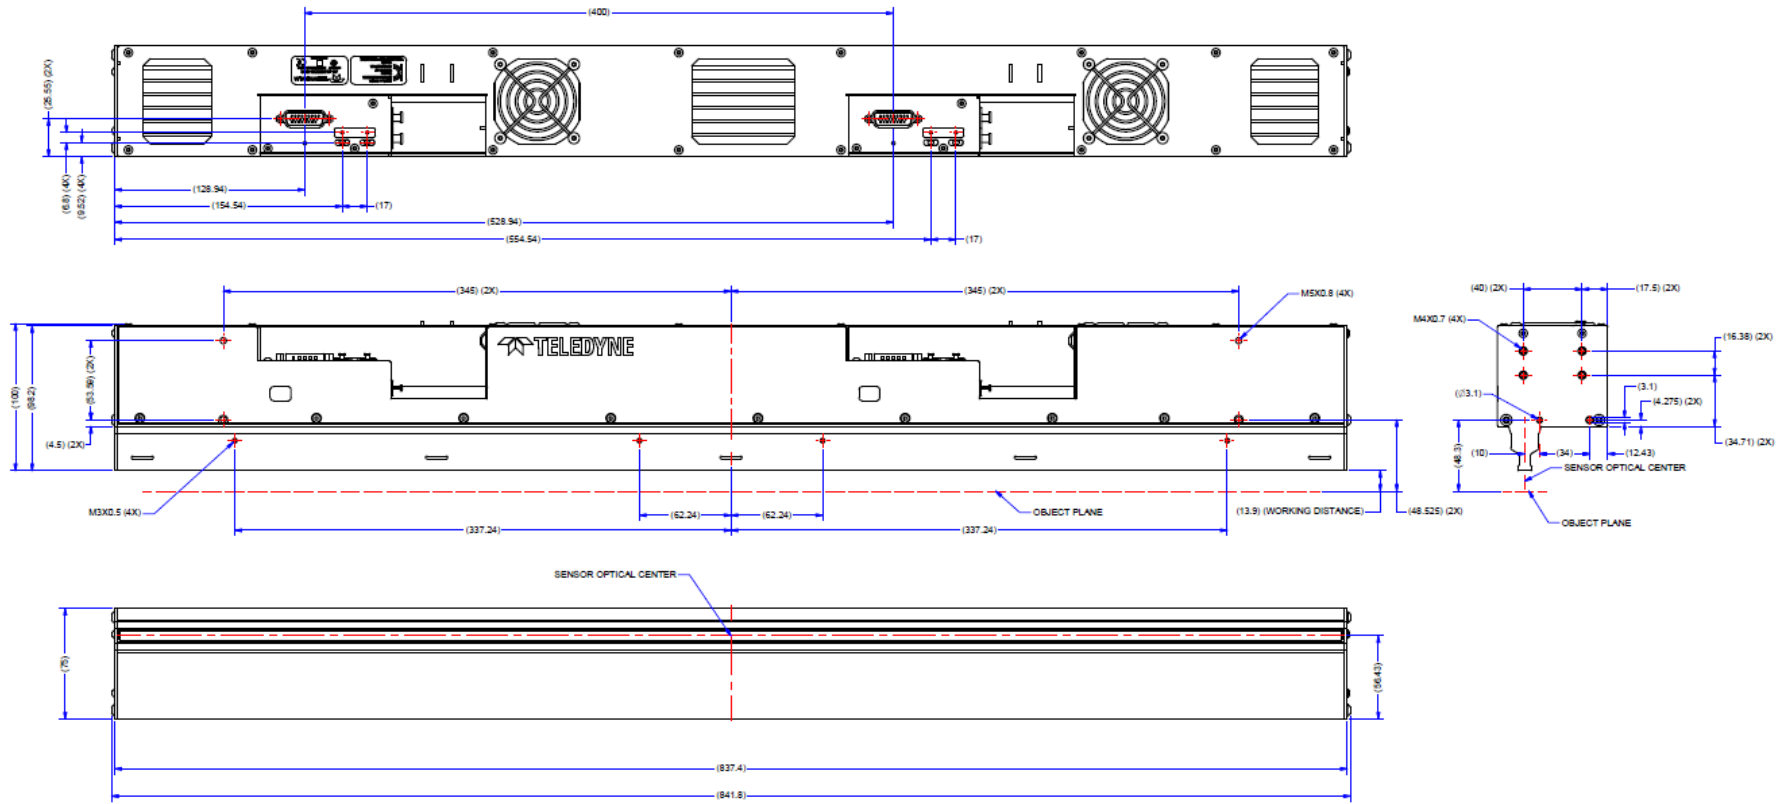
AX-FM-08A/B12H-00 800mm CIS Mechanical Drawing (without optional LEDs)
